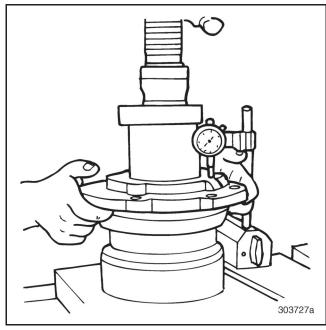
Measuring End Play with Bearing Cones, Spacer and Shaft Assembled in Retainer
